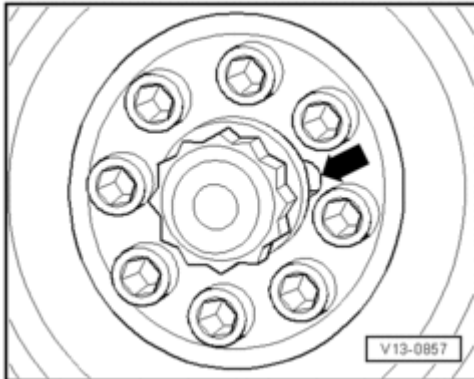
Making Sure That Notch In Vibration Damper Aligns With Locating Lug On Toothed Belt Gear
